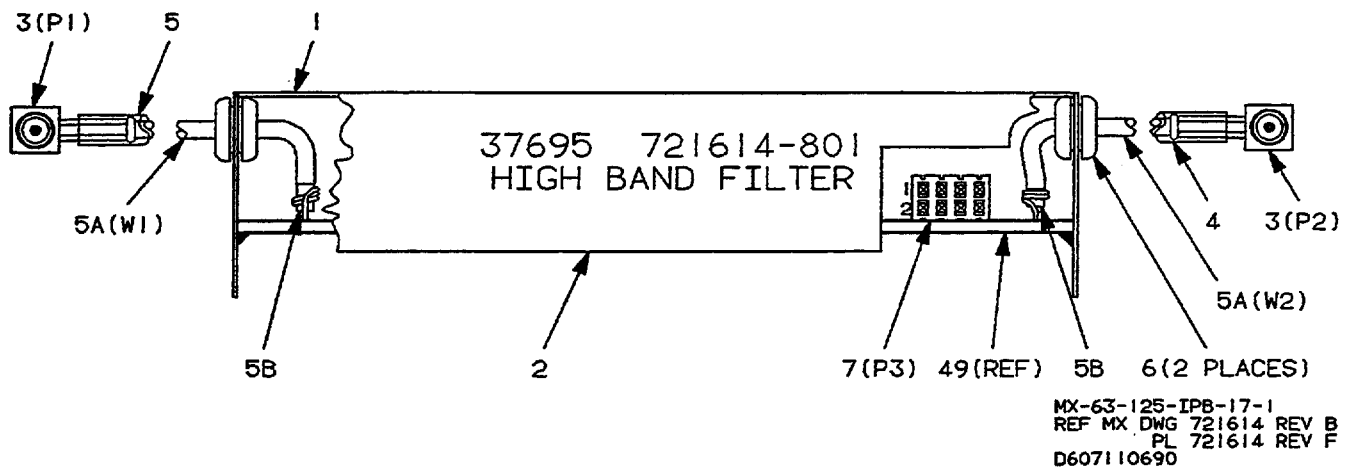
High Band Filter Module Assembly (Sheet 1 of 3)
